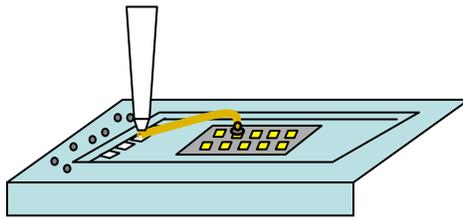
Capillary is brought over to the package bonding pad and the second bond is completed.
